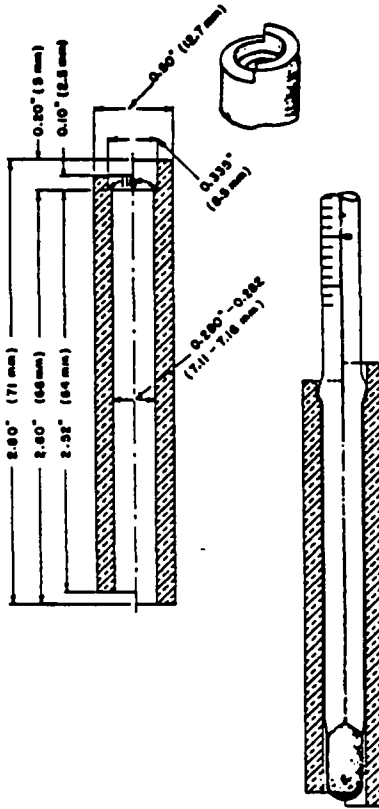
Test Gage for Checking Enlargements on Thermometers.
